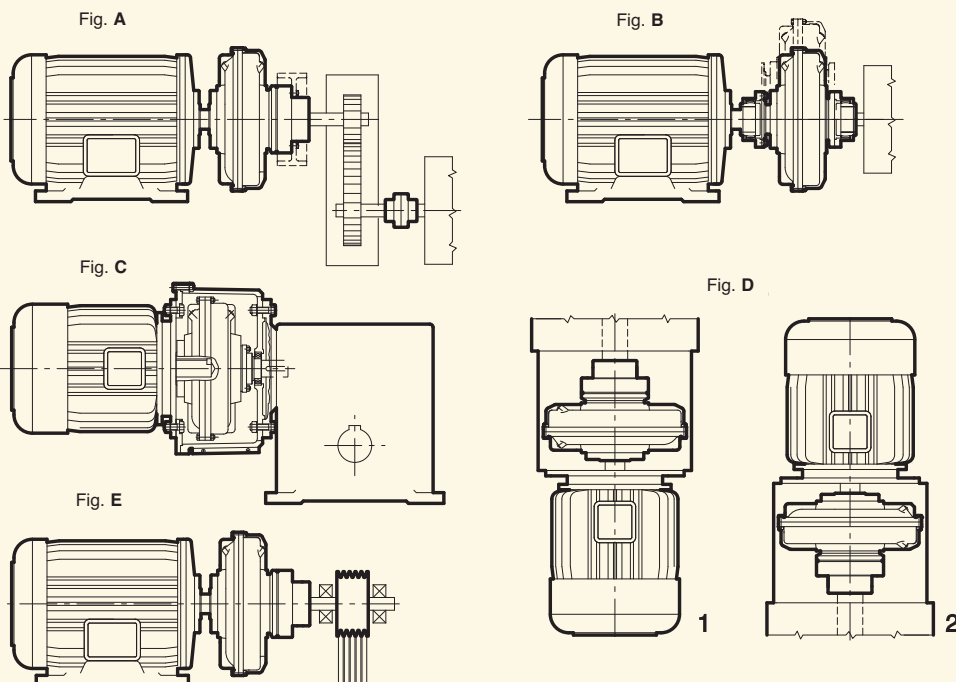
Fig. A Horizontal axis between the motor and the driven machine (KRG-CKRG-CCKRG and similar).
